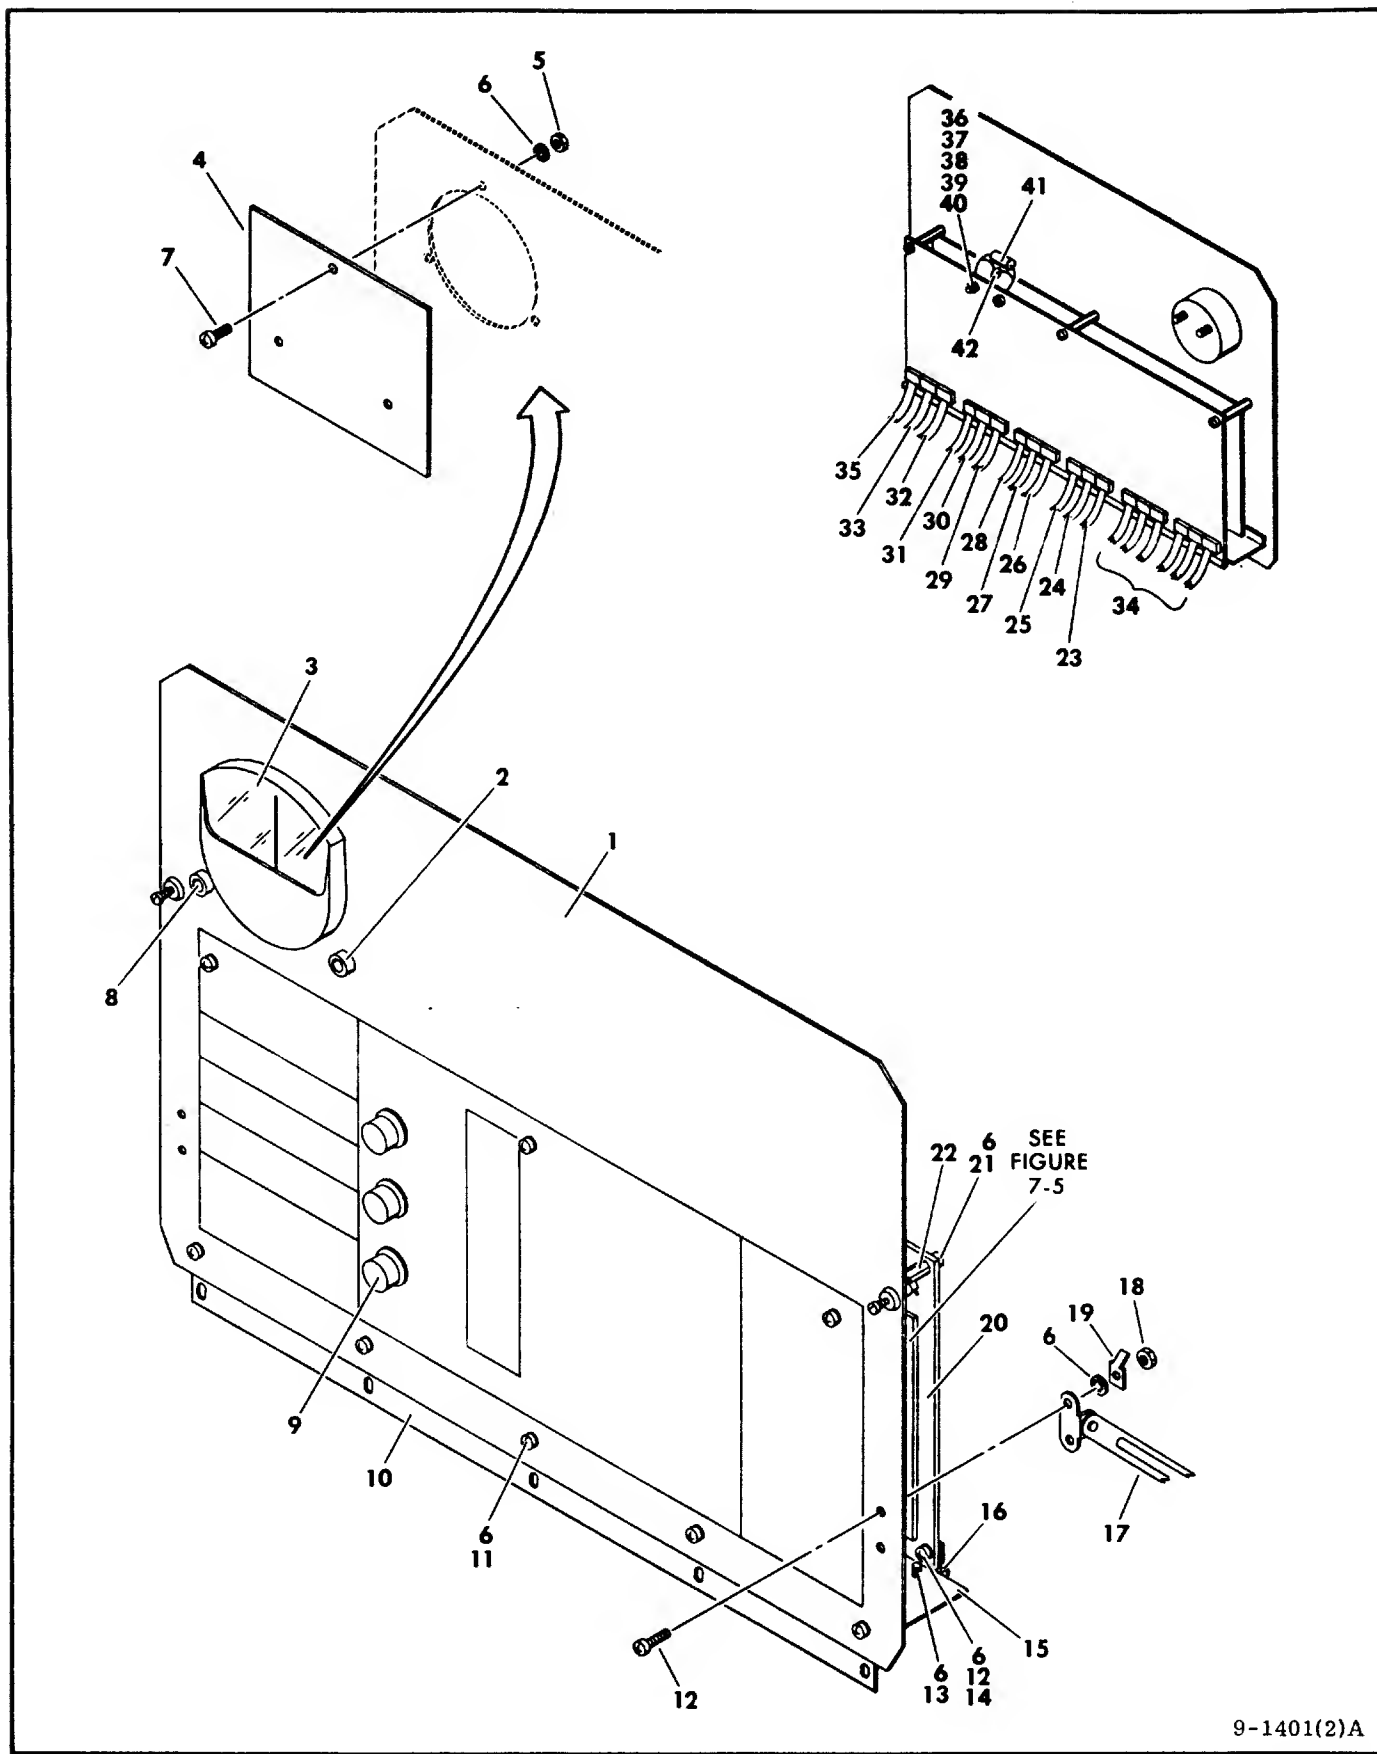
FINAL ASSEMBLY, RUGGEDIZED PACKAGE
